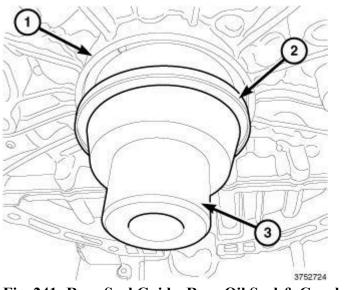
Rear Seal Guide, Rear Oil Seal & Crankshaft Courtesy of CHRYSLER GROUP, LLC
